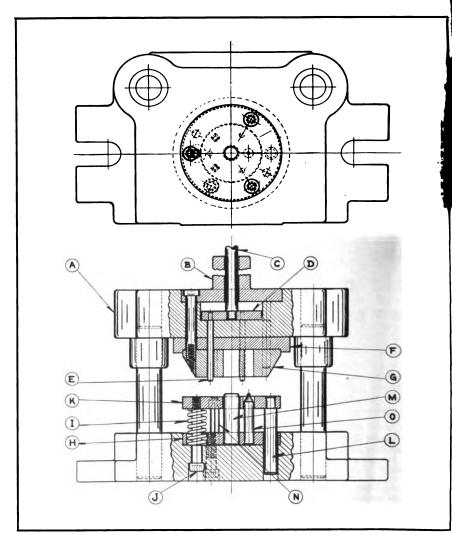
Drawing showing Design of Combination Lancing, Bending and Hubbing Die that Produces the Blank Illustrated in Fig. 1.
